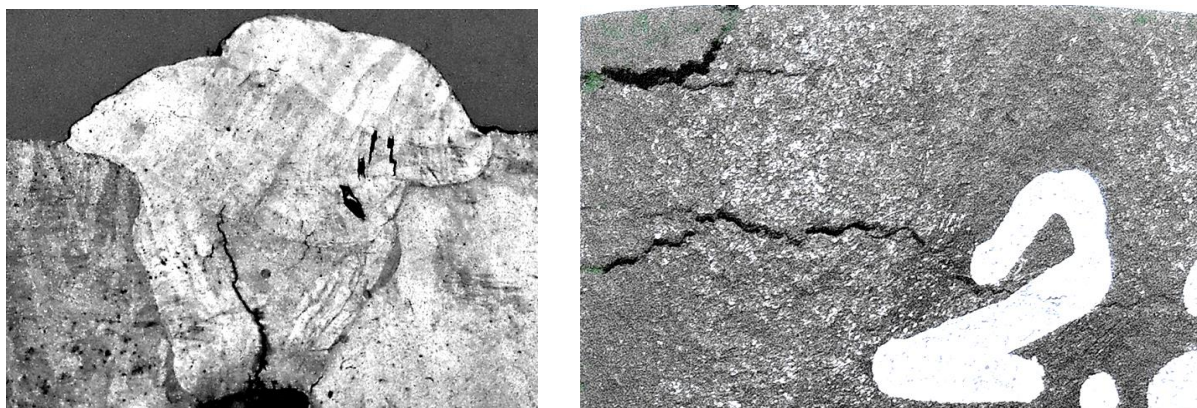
Weld seam damaged under repair and pipe after operation
